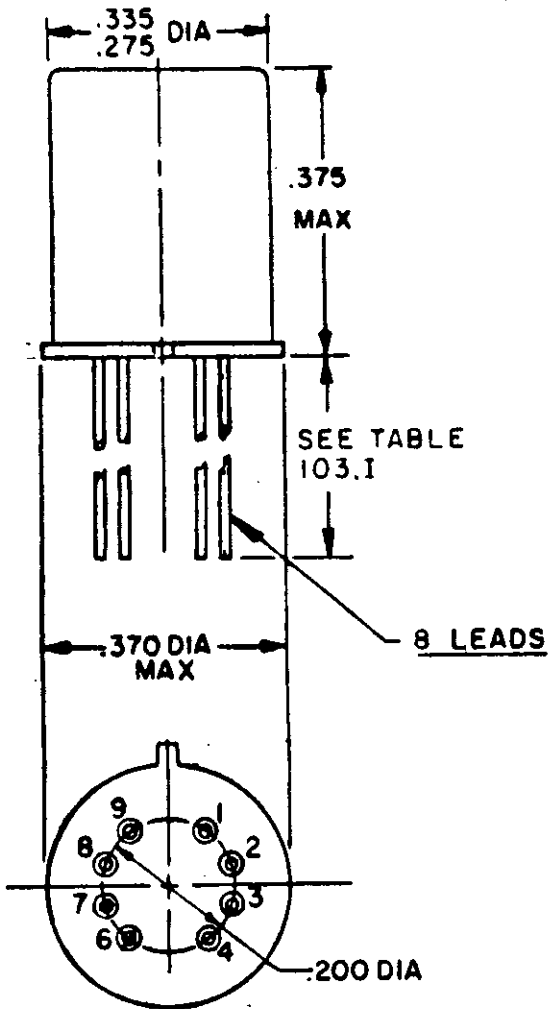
Relay, EM, ER, DPDT, low level to 2 amperes, (sensitive, 100/125 milliwatts), (MIL-R-39016/44).
